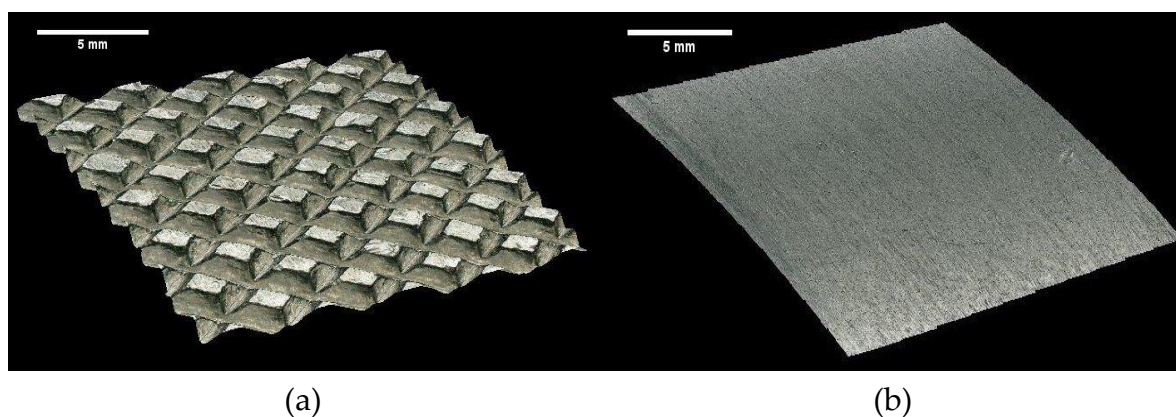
Optical image of a section of the knurled roller surface (a) and the smooth roller surface (b).
